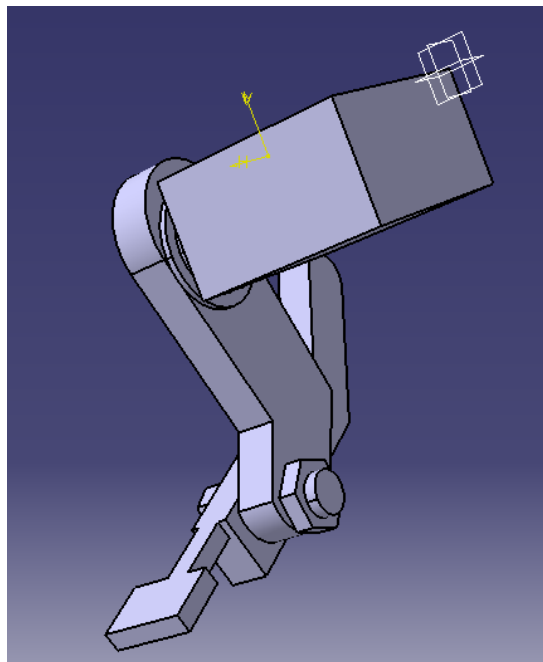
Backside view of Brake actuator fitted to the brake pedal with a bolt
